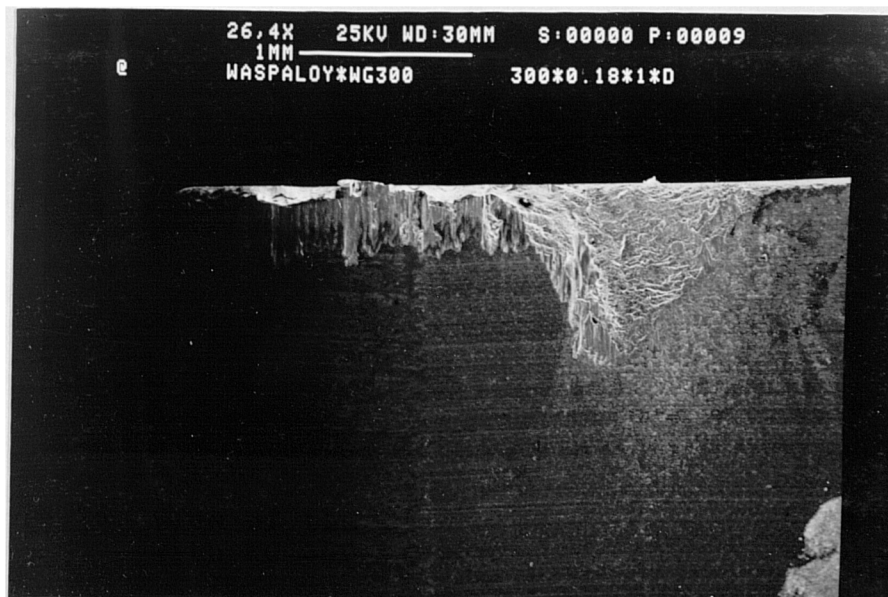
View of the flank wear, Dry machining of Waspaloy with WG-300 (V=90m/min, F=0.18mm/rev, DOC=1mm)
